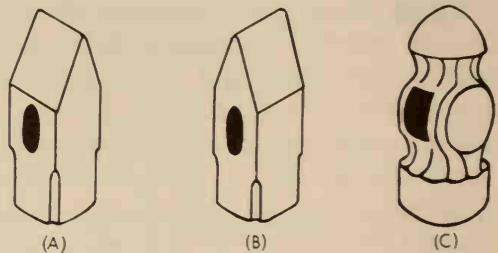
Forging hammers. A-Cross peen; B-Straight peen; C-Ball peen.
